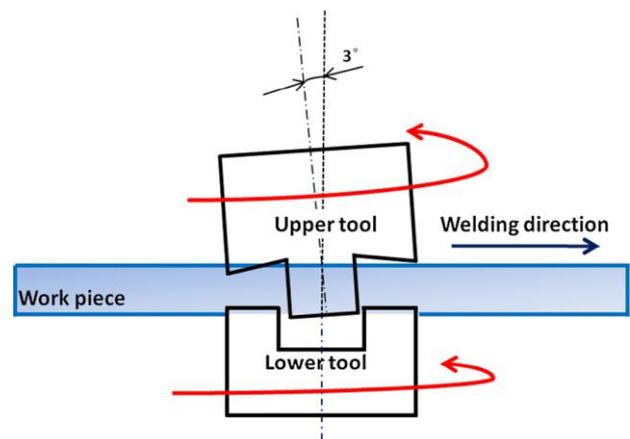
Schematic illustration of the DFSW with a concave lower tool.
